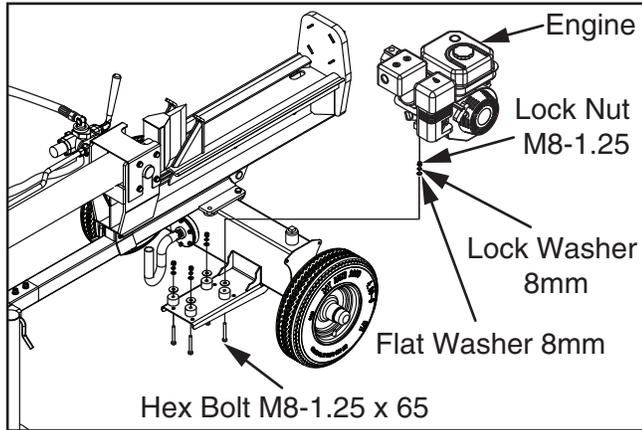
Installing rubber spacers and flat washers onto engine mounting pad.
